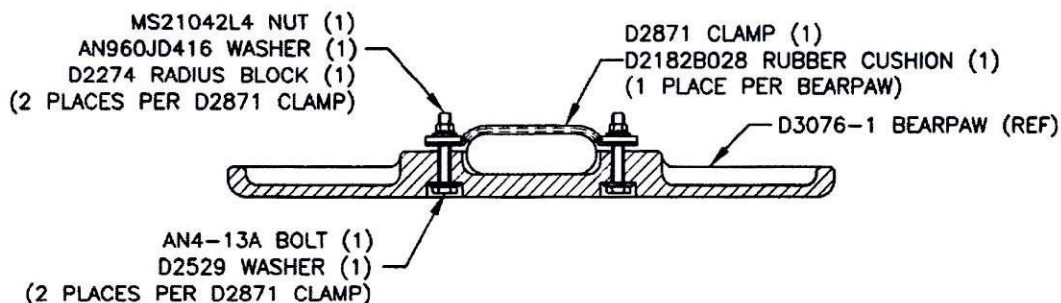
Bearpaw Installation. Aft Clamp (section view)
